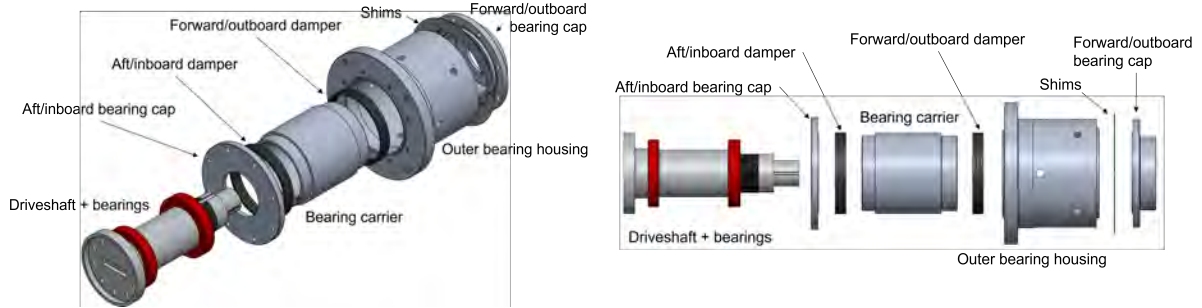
Isometric (left) and side (right) exploded views of bearing housing module
